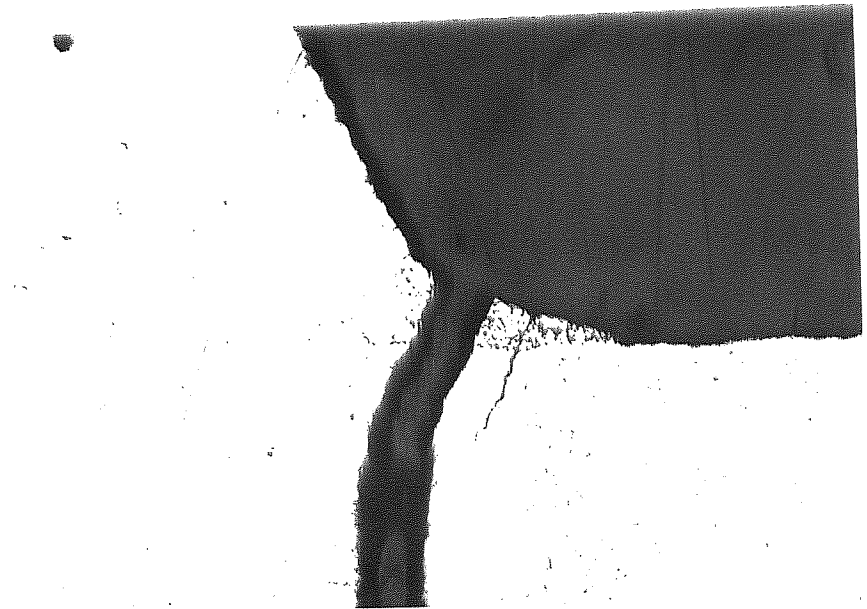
Fracture Surface in a Specimen containing a Central Defect. Magnification x 7.
